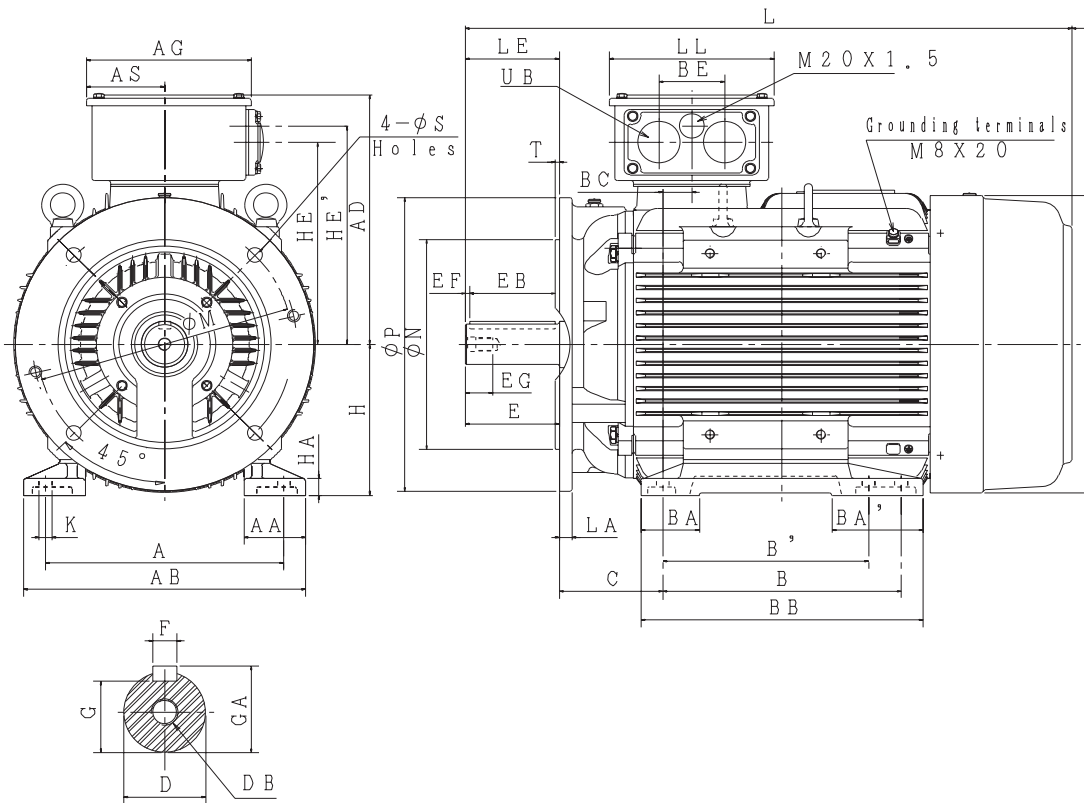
Outline drawing of cast iron design, feet version, mounting B35; frame size 200L - 250M
